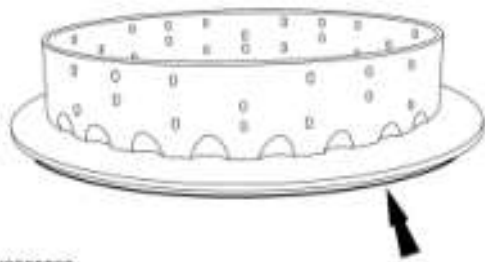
Locating O-Ring Seal Onto Forward Clutch Balance Dam
